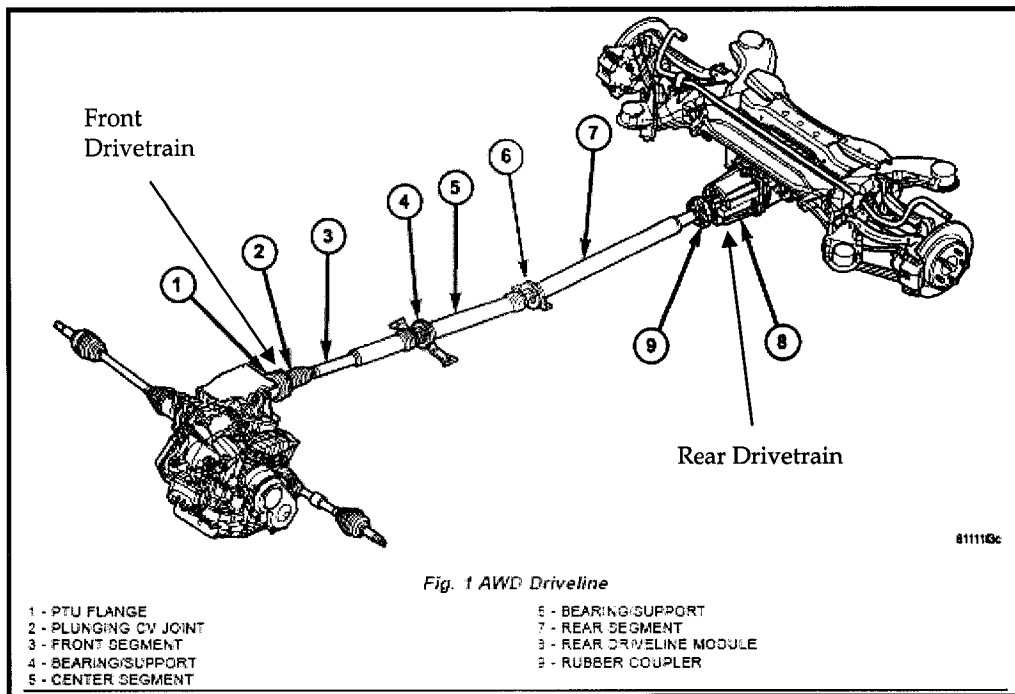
Pacifica AWD drivetrain schematic drawing (Courtesy of DAIMLERCHRYSLER Corp.)
